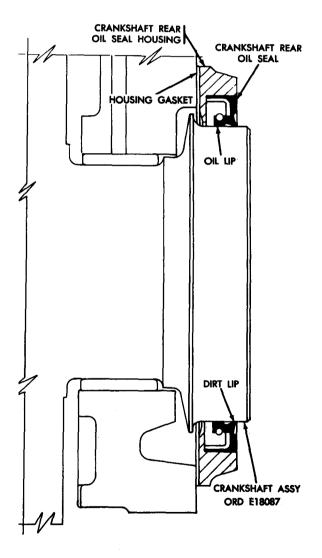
CRANKSHAFT REAR OIL SEAL IN OIL SEAL HOUSING.
